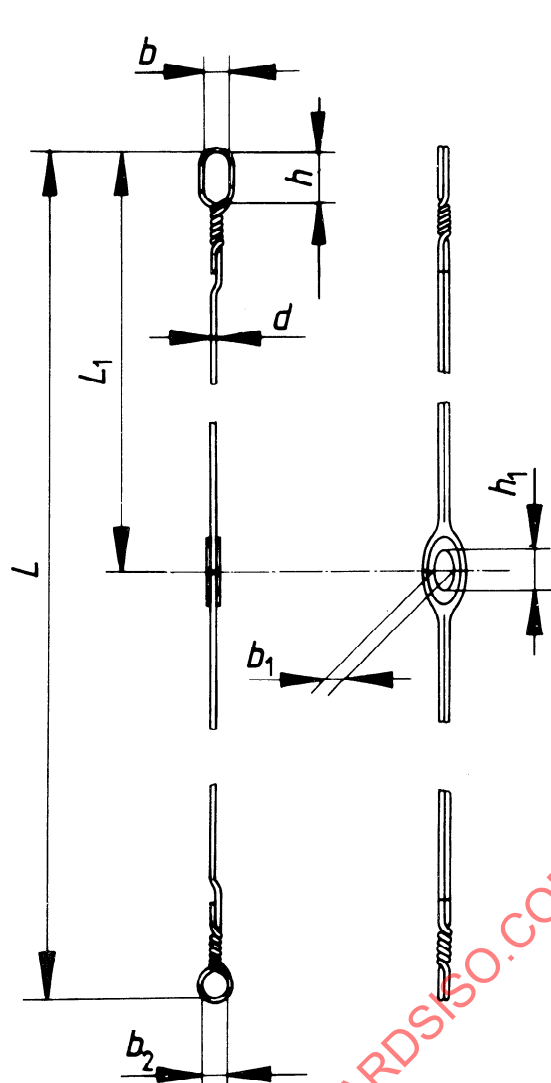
Heald type A, with upper and lower end loops, O-shaped
